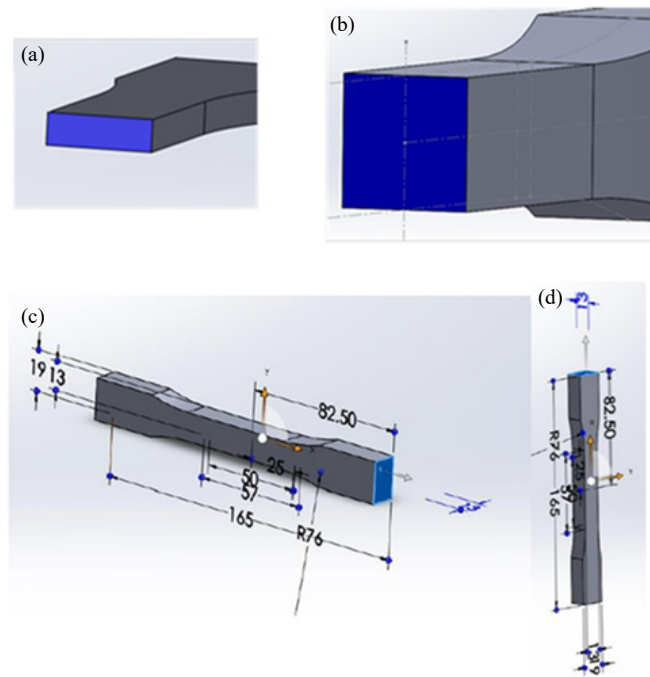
Cross-section: (a) Traditional 2D test coupon; (b) Homogenized 3D test coupon; (c-d) CAD design of 3D tensile test coupon
